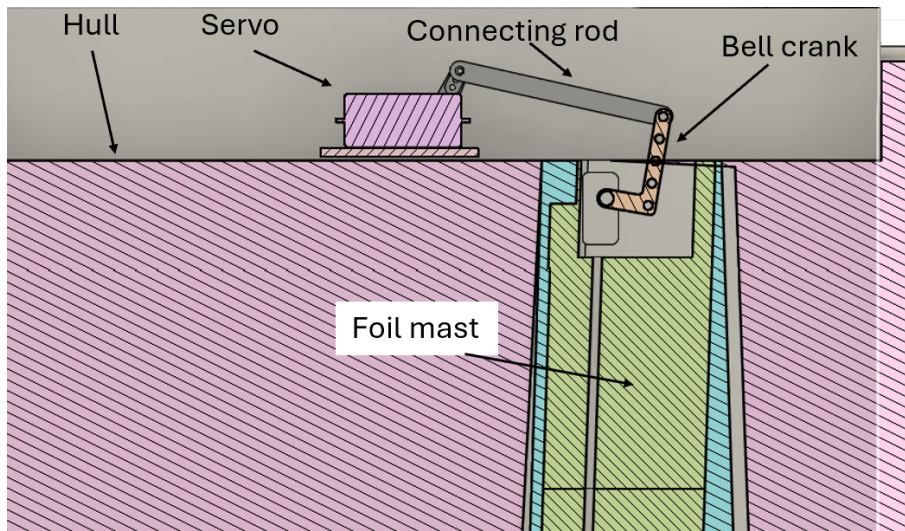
Section view of servo mounting arrangement, from CAD mockups
